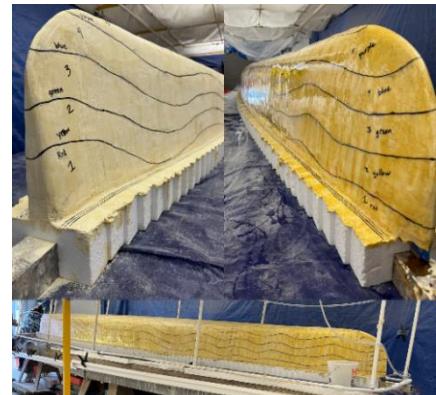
The mold after sanding and adding sharpie (left), the mold after adding resin (right), and the finished mold (bottom).
